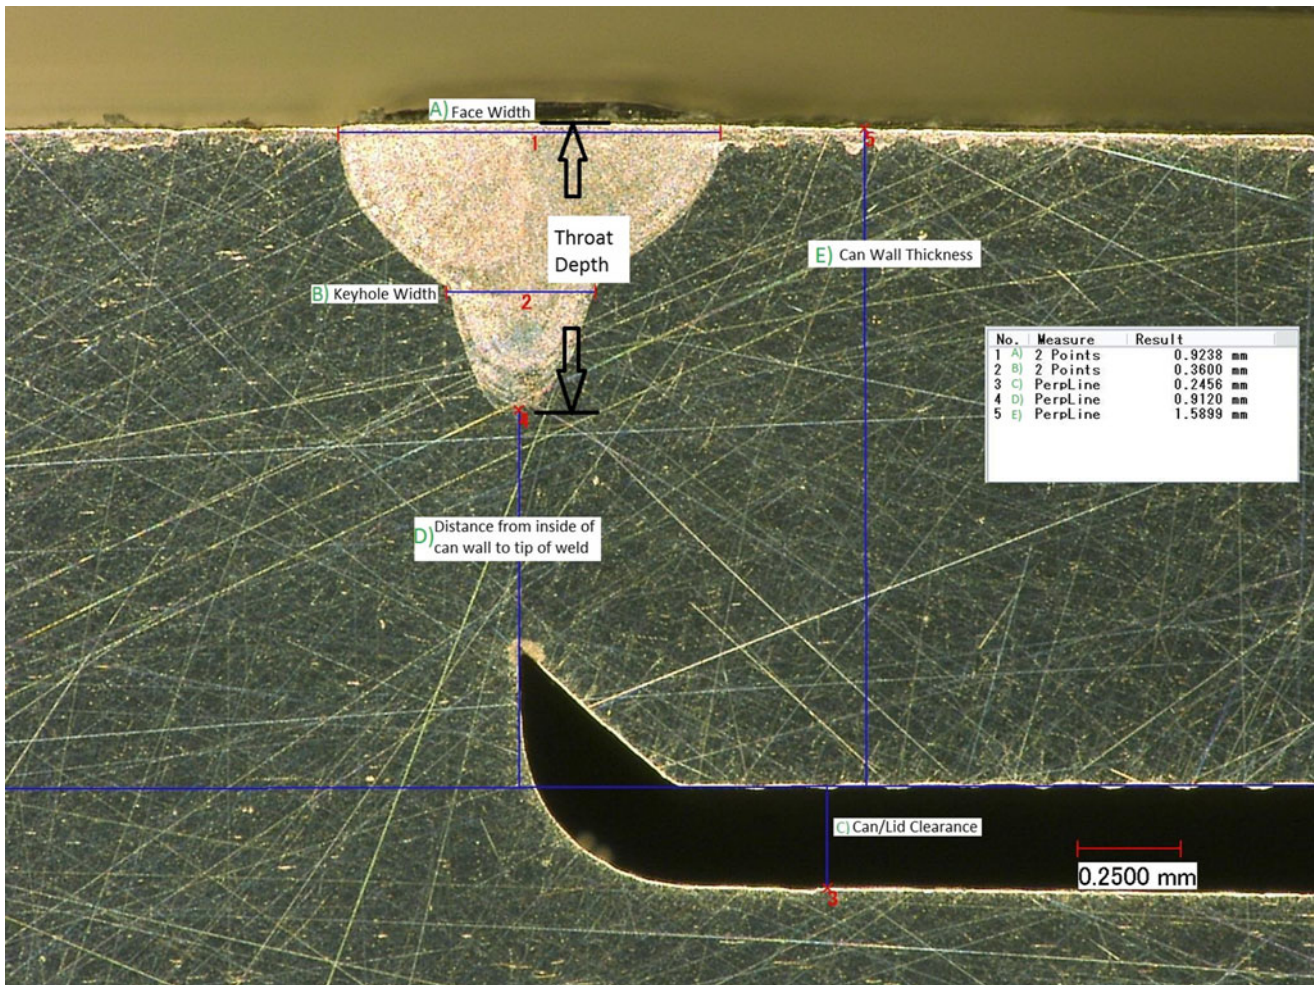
Measurements of laser weld used to determine weld penetration depth and geometry details
